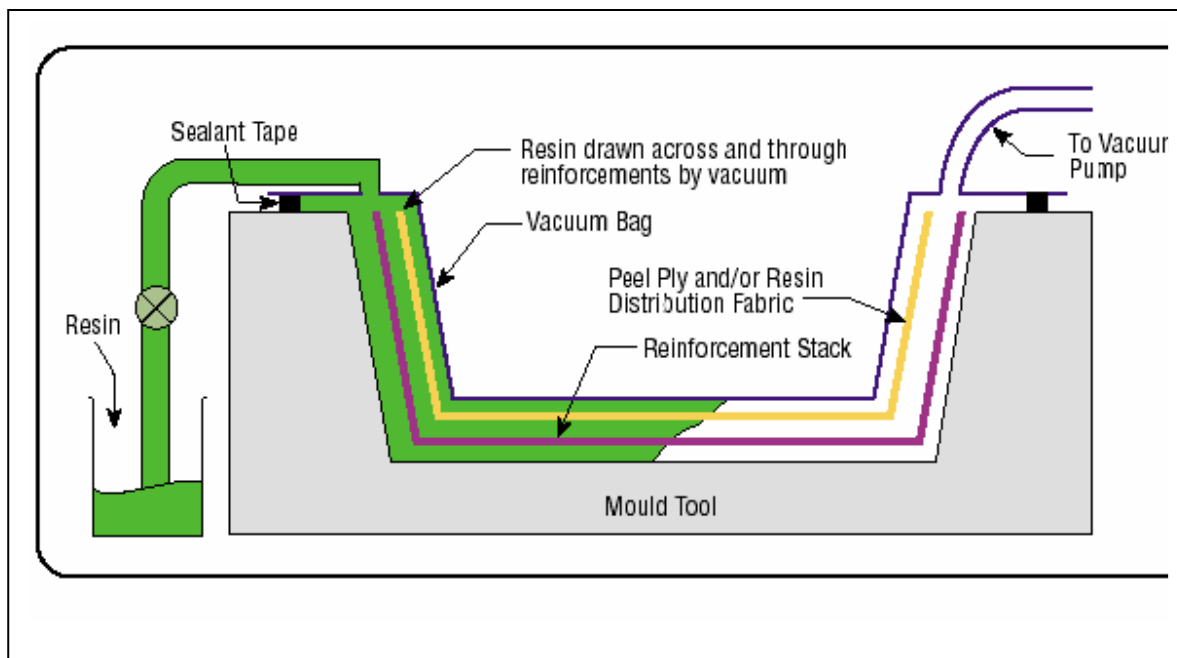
Vacuum Assisted Resin Transfer Molding set-up
